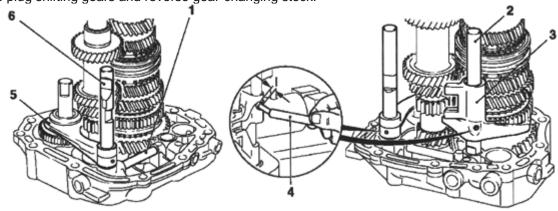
Setting components mechanism switching 1 - d / 2 - d transfer:
